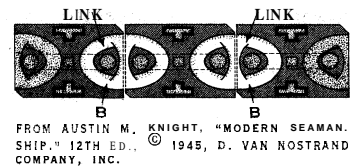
MOLD FOR CAST-STEEL CHAIN
